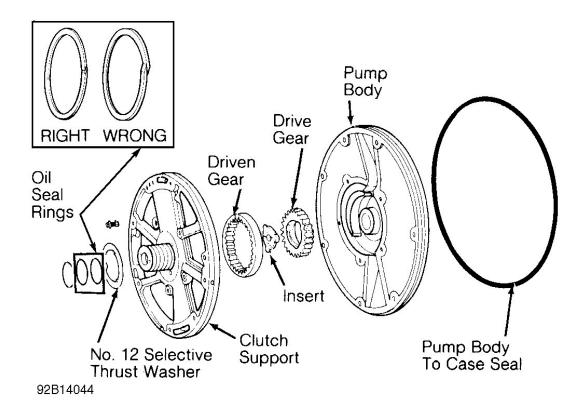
Exploded View of Oil Pump Courtesy of FORD MOTOR CO.
